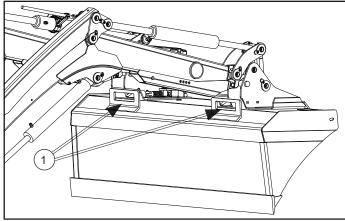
Perform a visual check that the locking pins (1) on the skidsteer quick attach are fixed and locked onto the implement's contact surface.
